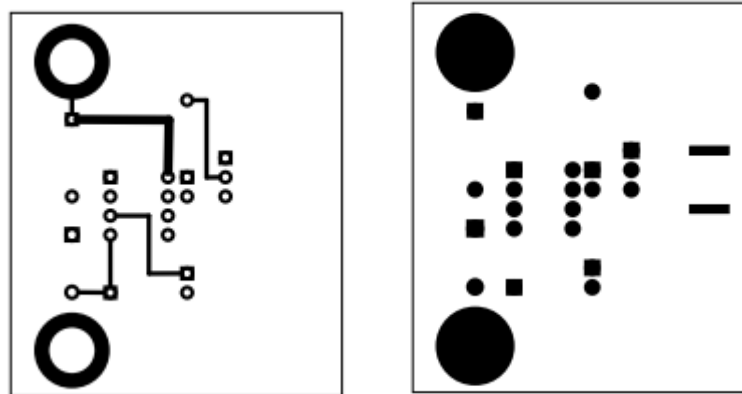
ETCH MASKING FOR PCB PRODUCTION
